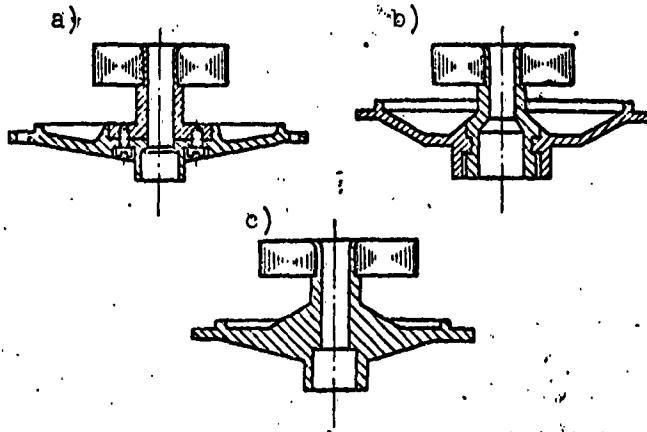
Attachment of covers to housing and of stators to covers: a) With Screws; b) with outside thread on catch; stator is secured to bushing cast integral with cover; c) with threaded ring; stator is mounted on steel bushing reinforced during casting of the cover.
